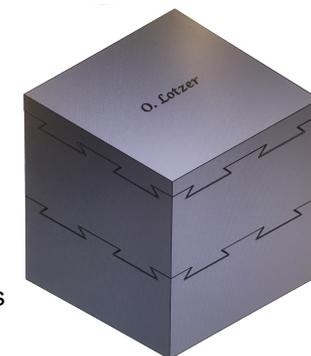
Collapsed View of 3D Model Pieces 3, 19, 20, 31, 36. Assembly 15
